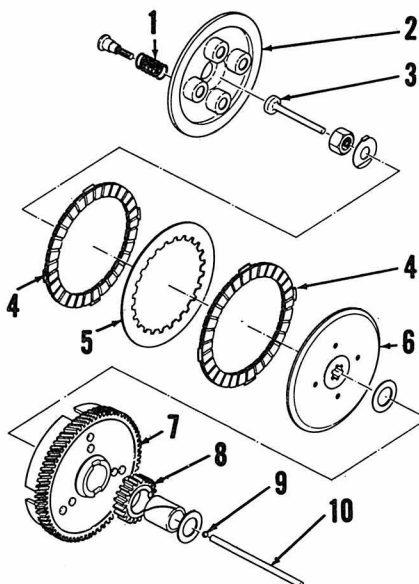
Clutch assembly used on JT-1 models.
